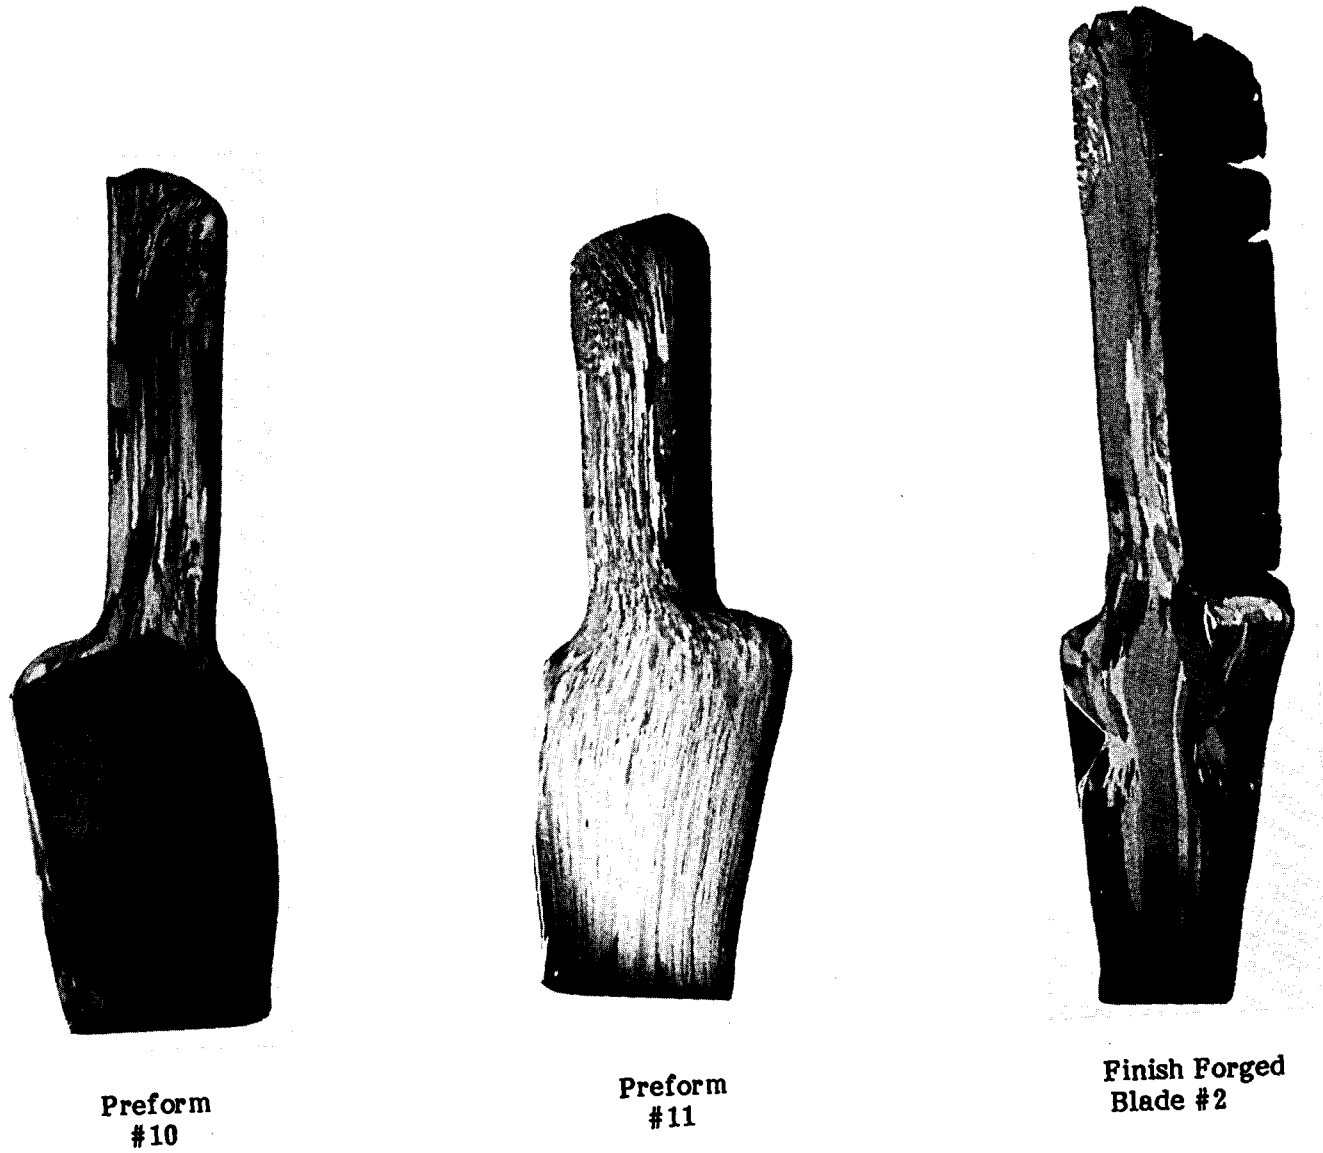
Macrostructures of Zone Annealed MA-6000 Blade Forgings.
